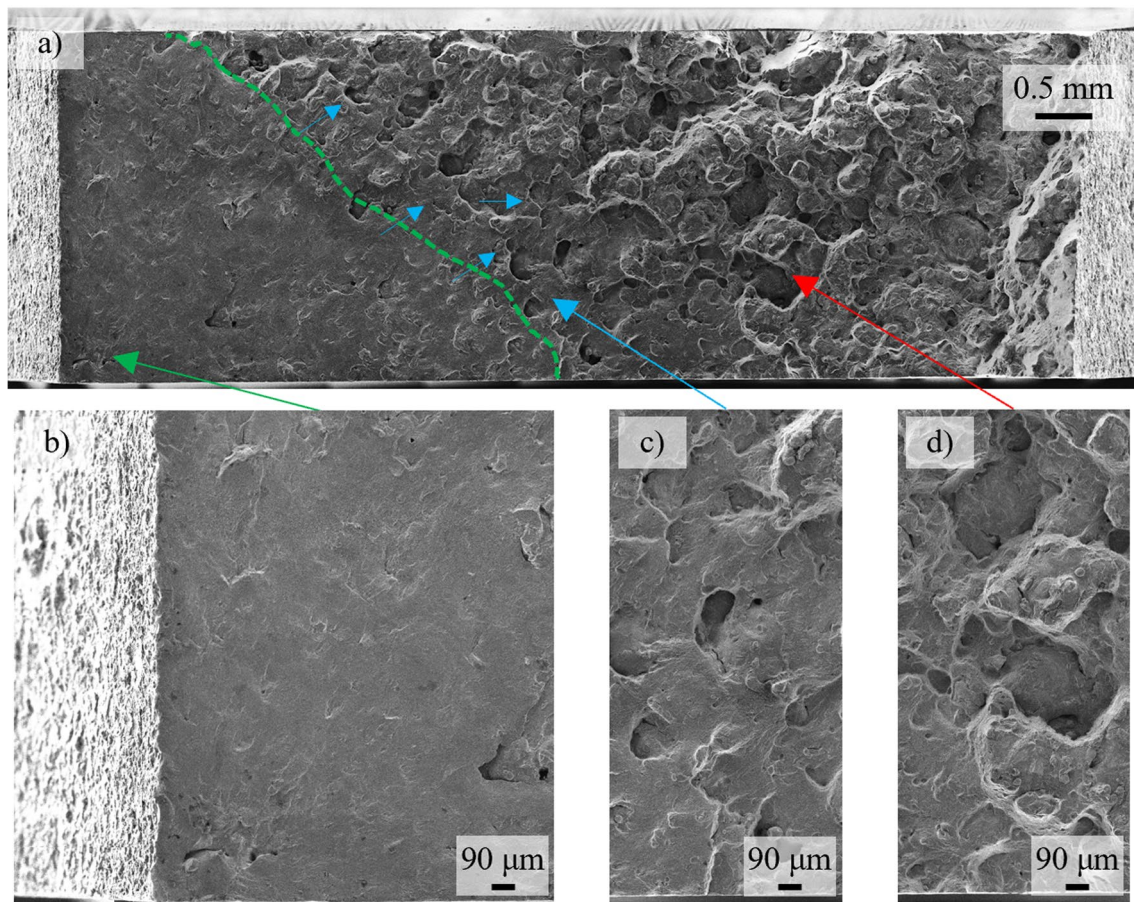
shows the fracture surface along the BM of the HT FSW joints after fatigue tests. Two different zones can be observed: the region of fatigue crack propagation and the final fracture. The fatigue crack nucleated on the metal surface of the samples (indicated by the green arrow) and then propagated under dynamic loading conditions, forming a region with a fracture characterized by a nearly flat surface. This is followed by a narrow transition zone (indicated by blue arrows) and then the final fracture surface, which exhibits a much more ductile appearance (indicated by the red arrow). A similar crack nucleation mechanism induced by
